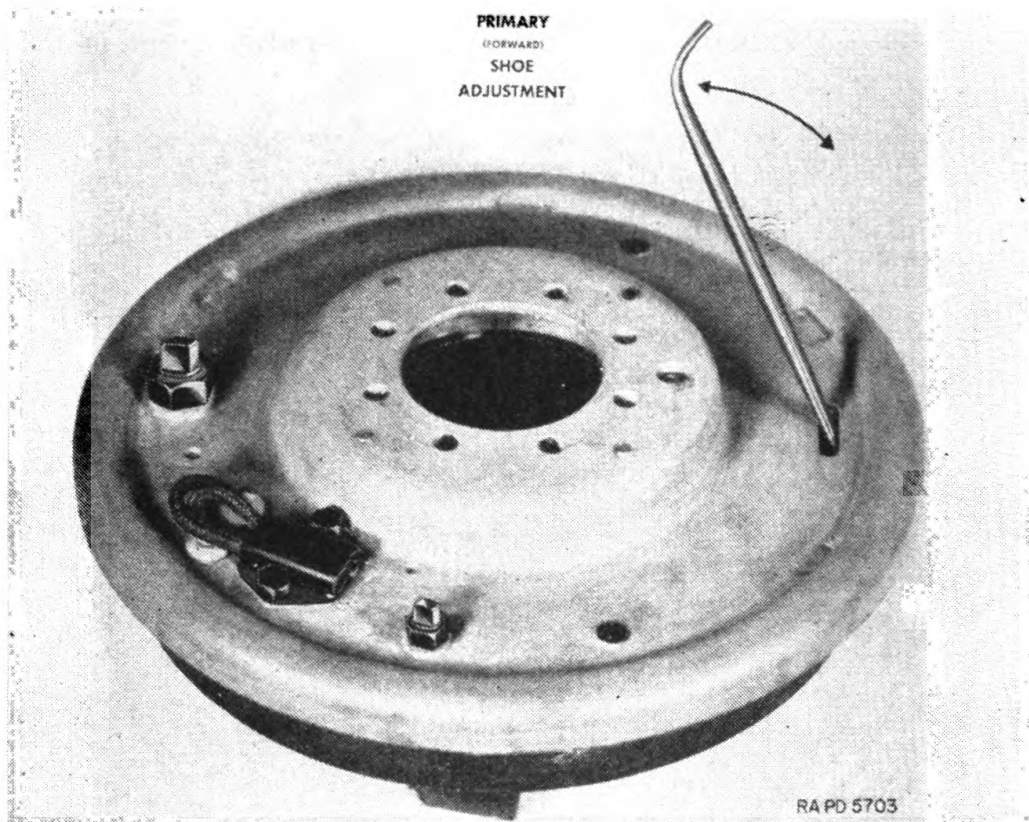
Primary shoe adjustment, lever type electric brake.
